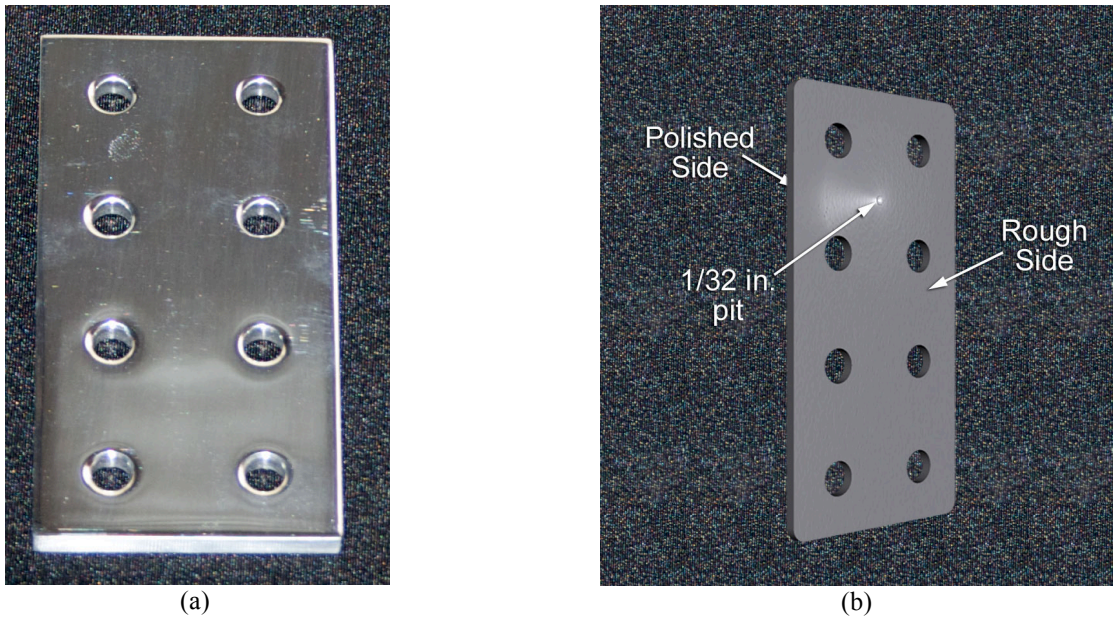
The test coupons were 2×4 inches, drilled on 1-inch centers. One side (a) was polished, the other (b) was rough. The rough side had a small defect made by a 1/32-inch drill.
